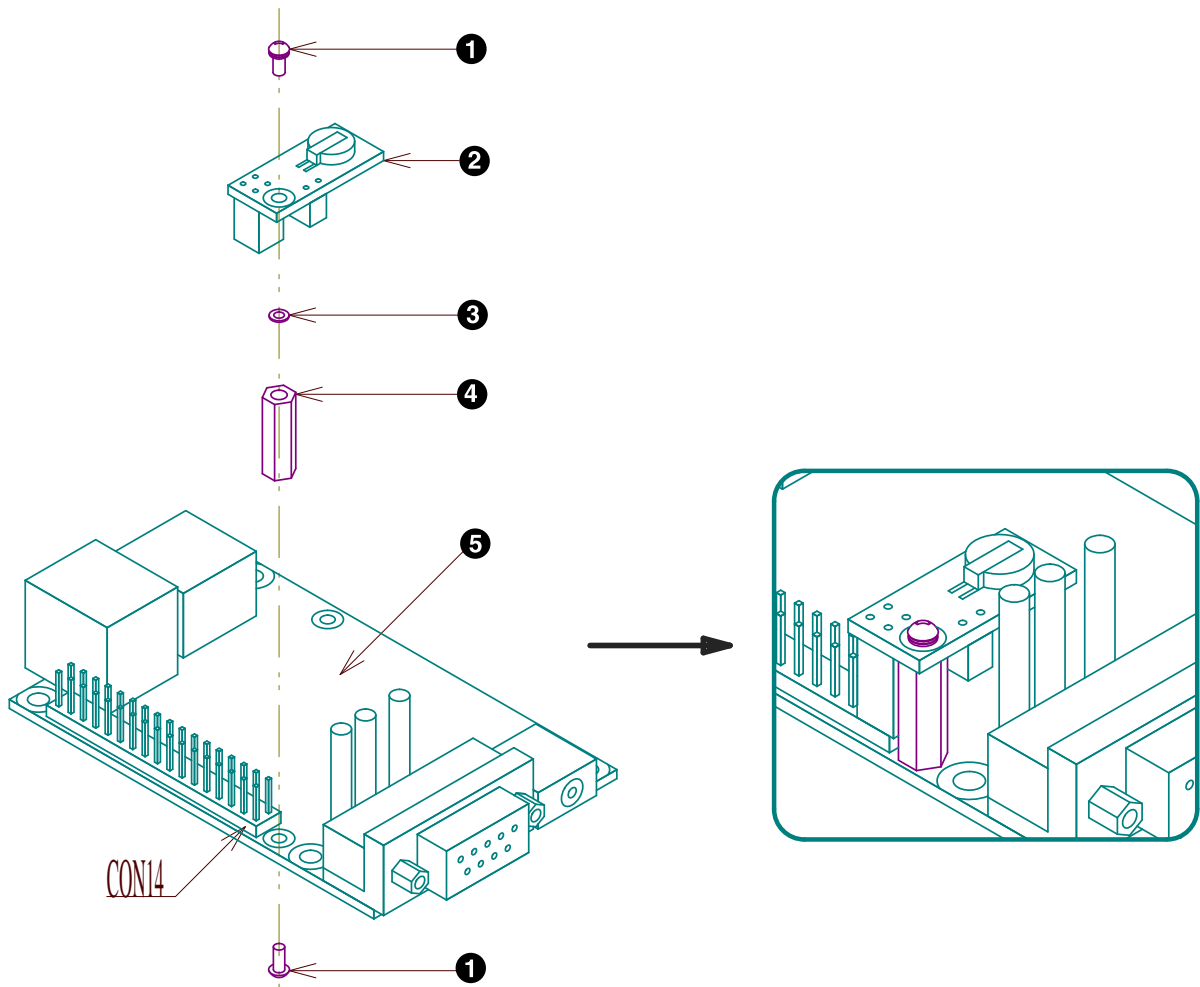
RTC Option Module (Product ID: OP-A400RTCMOD-00) Assembly Diagram
